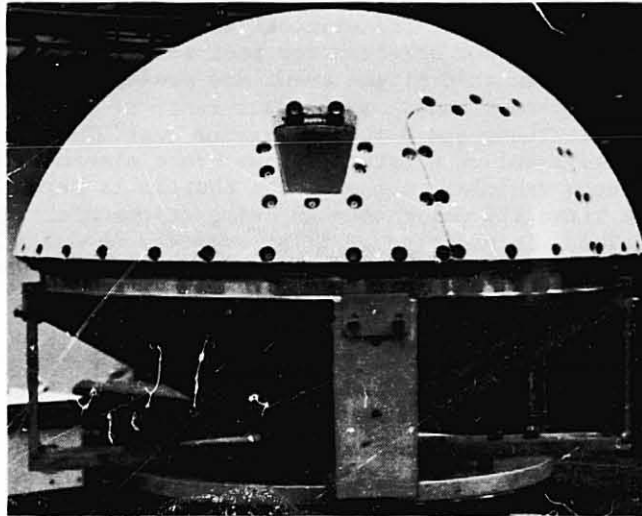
PROBE ENGINEERING MODEL - PARTIALLY ASSEMBLED
